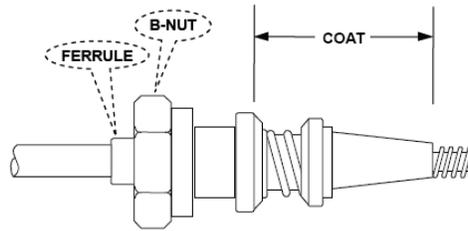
Coating Insulating Sleeve: MS 122 DF Spray on Ignition Lead Wire
